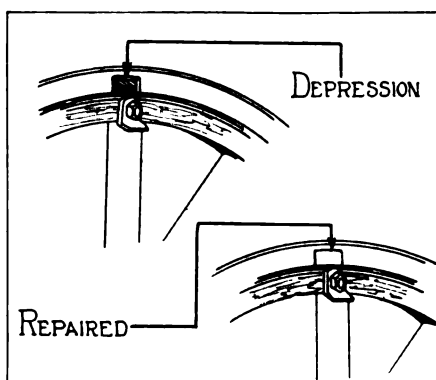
Demountable Rim Repair, the Top Sketch Illustrating the Worn Part and the Bottom View the Repair.
